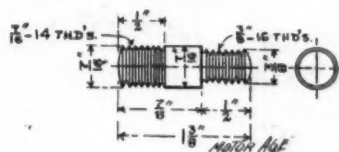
Admission Valve Chamber and Cover Studs.
